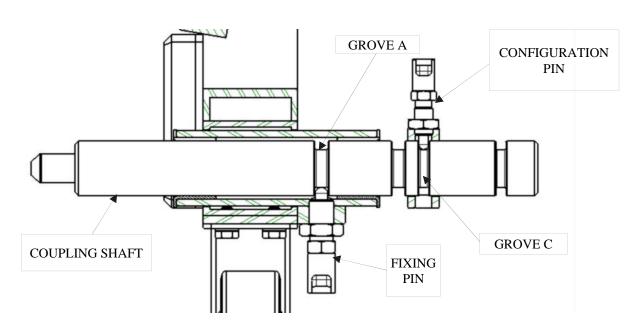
Tow Bar Assy: coupling device set for landing gear with PAD/SKI
